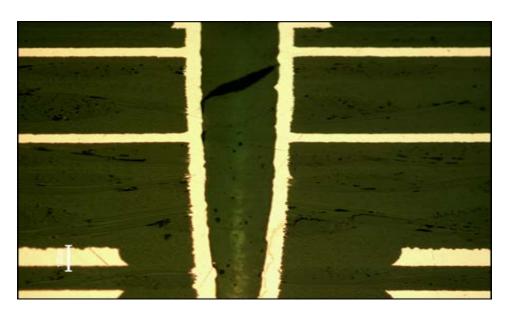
Cross section of PCB plated through-hole on oil exposed server [21]
